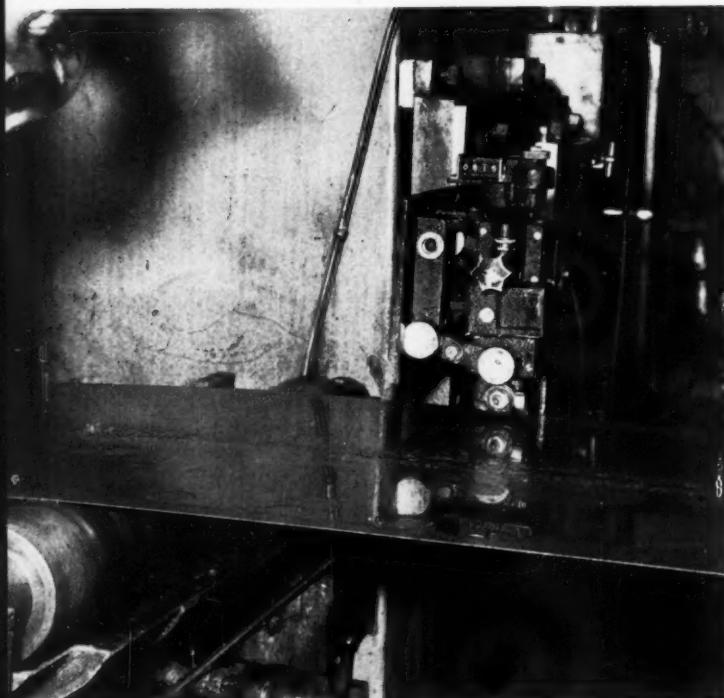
Built-in Thy-mo-trol panel on milling machine
